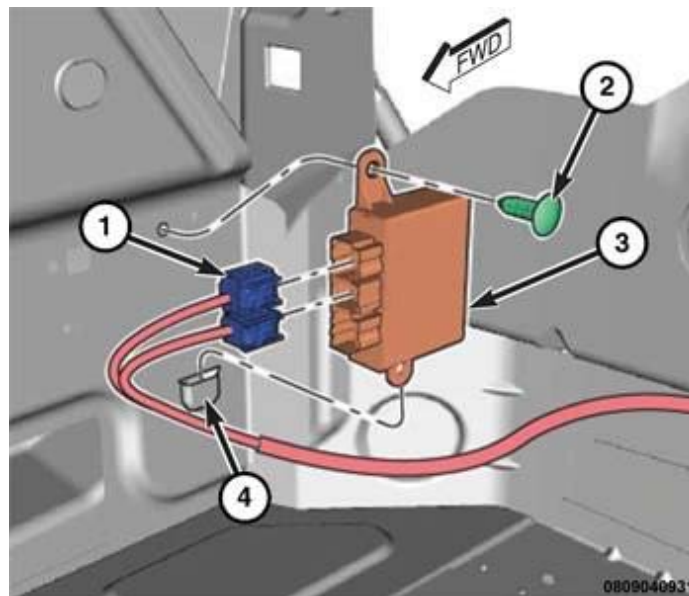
Park Assist Module (PAM), Wire Harness Connectors, Stamped Pocket & Retainer
